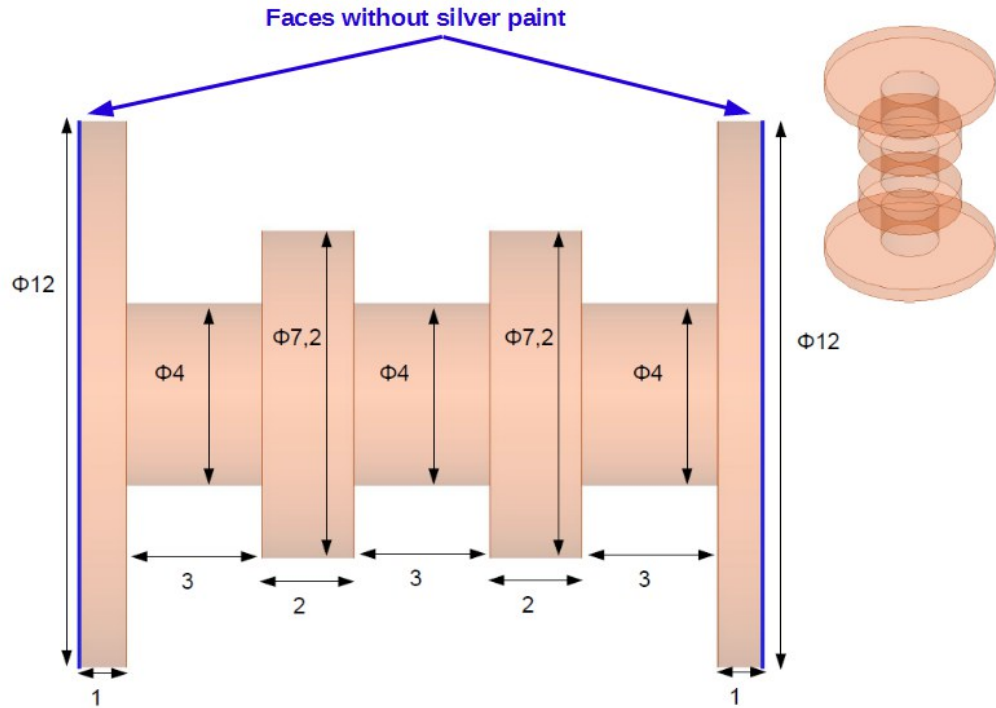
dimensions (in mm) of the 3-pole filter covered by silver paint
